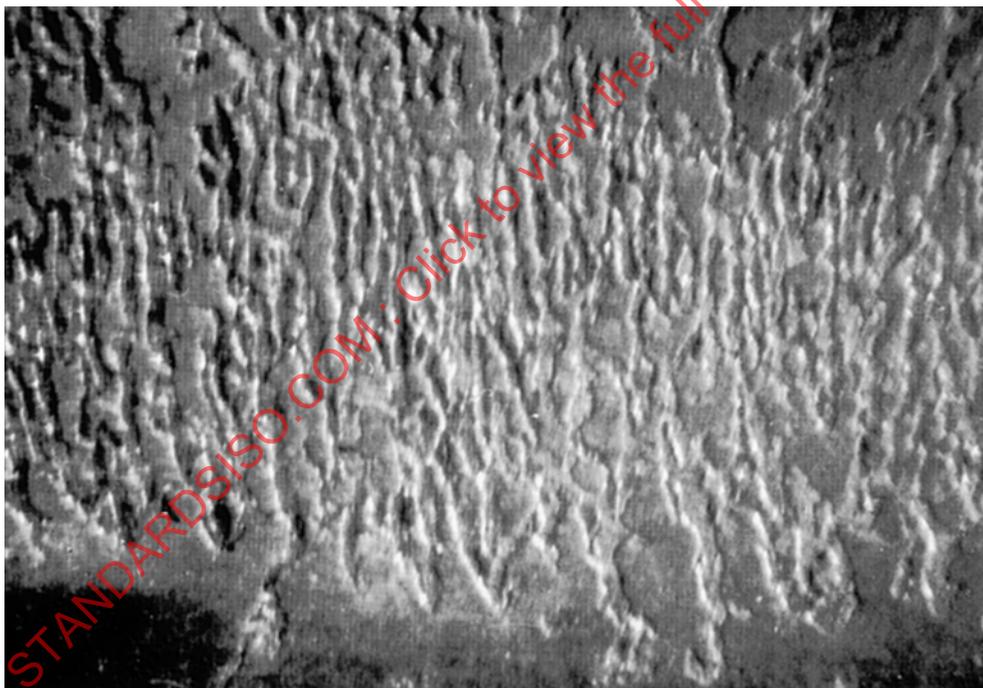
Typical fatigue cracks of internal combustion engine bearing (material: steel/aluminium alloy)
